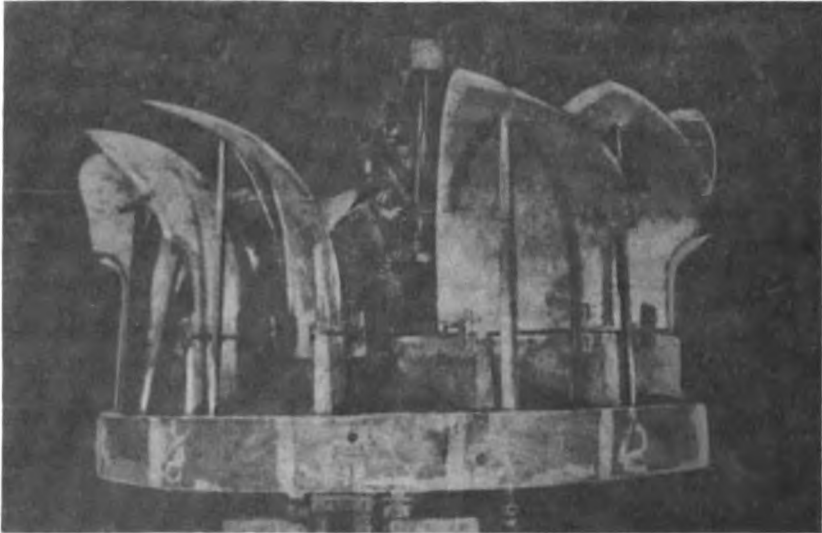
Shop assembly of the runner before welding
